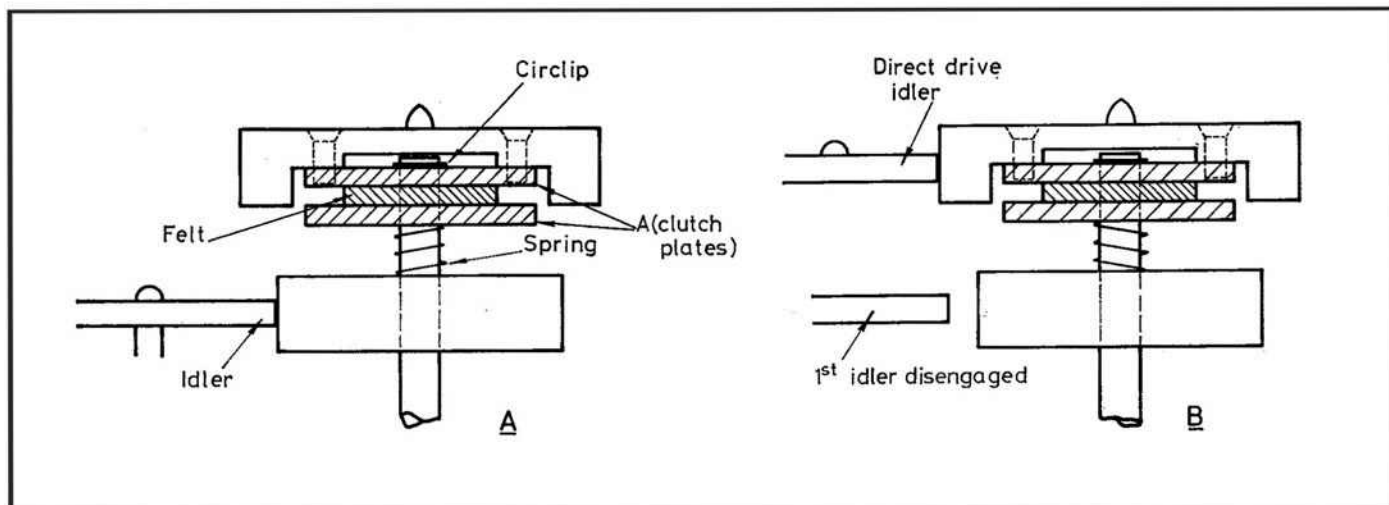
(A) A commonly used spring clutch. (B) Clutch bypassed and direct drive applied for fast forward.
